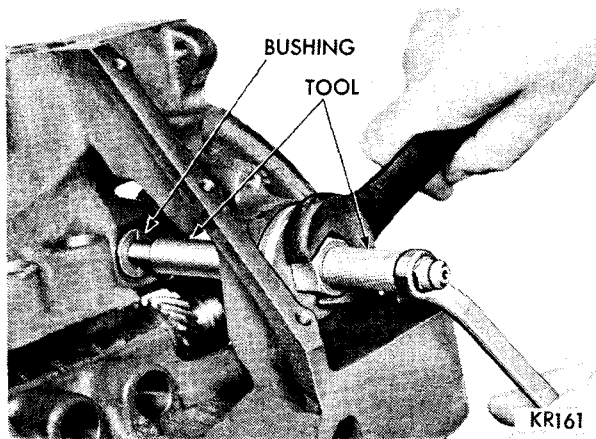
Burnishing Distributor Drive Shaft Bushing
